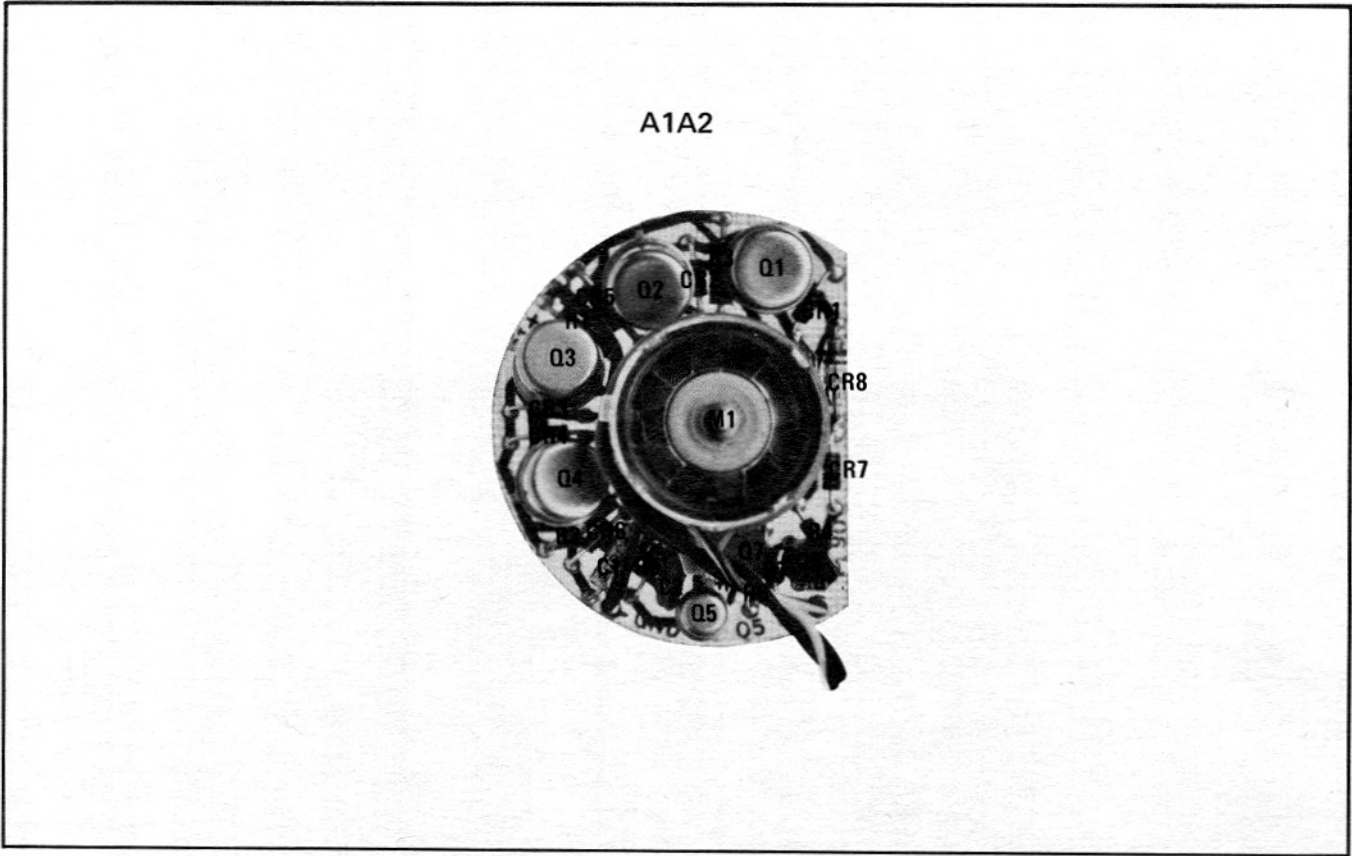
Fan Motor Assembly A1A2 Parts Locations (CHANGE D)
